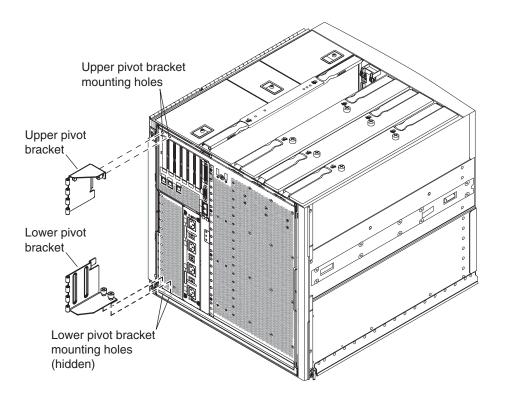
Upper/Lower Pivot Bracket Mounting Holes
